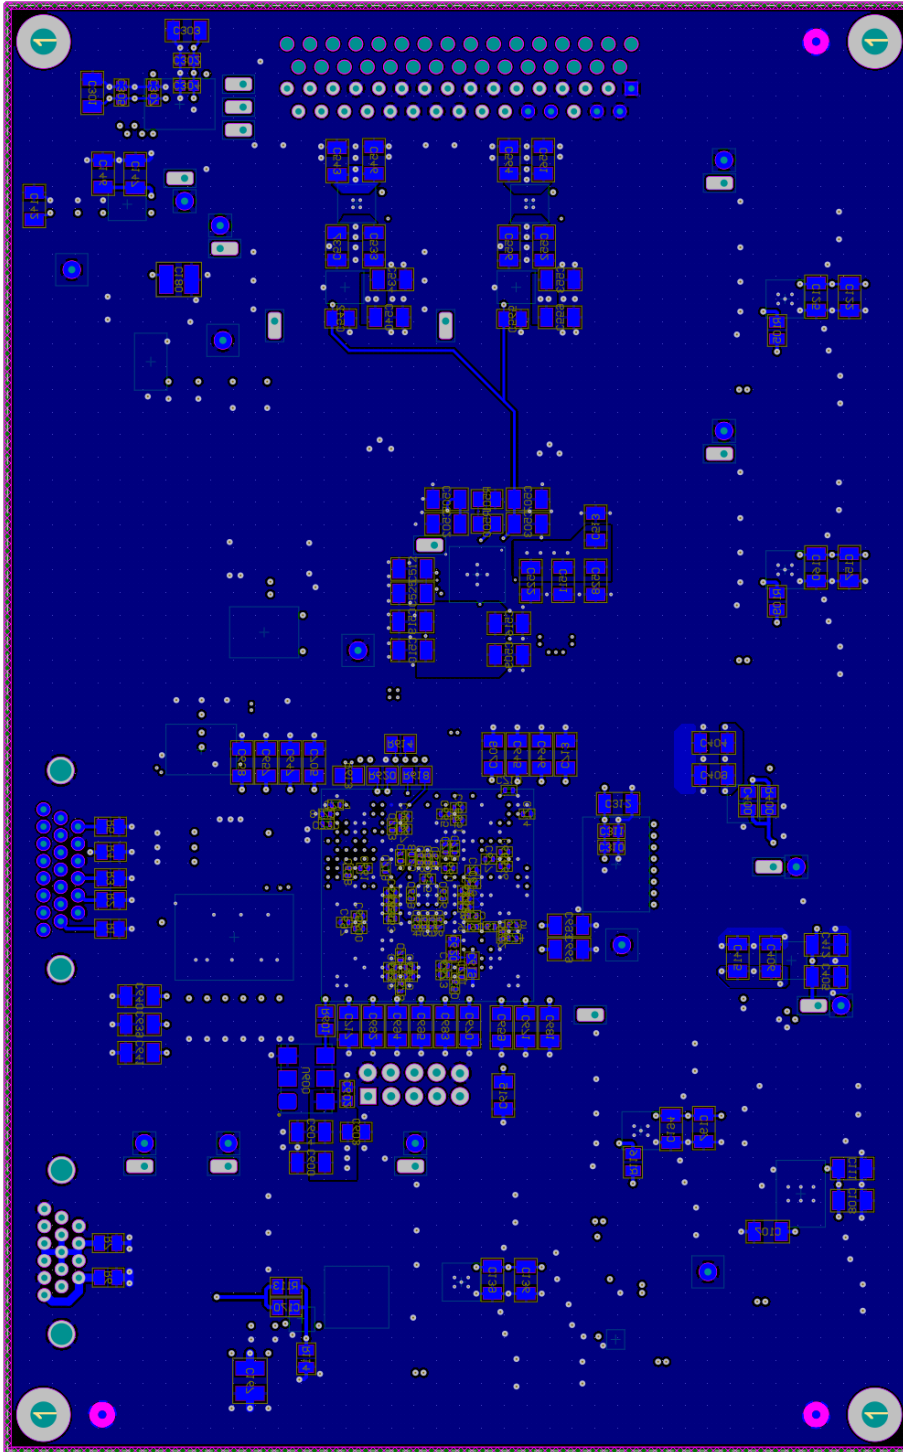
PEU Layout Bottom View - The Bottom side is mainly used to place larger capacitors, which would use a significant area on the top side and prevent shorter signal paths.
